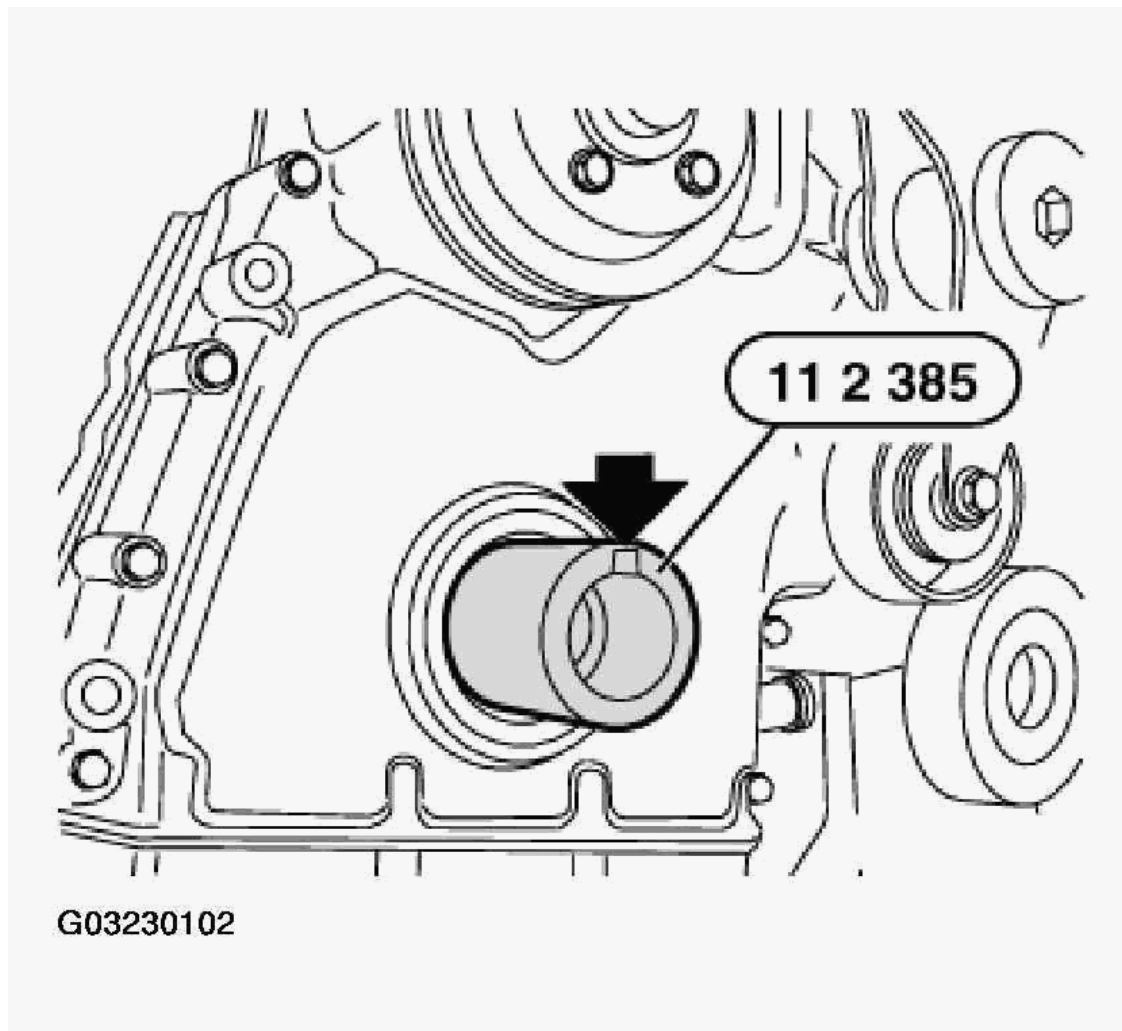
Aligning Groove In Puller To Featherkey Of Crankshaft
